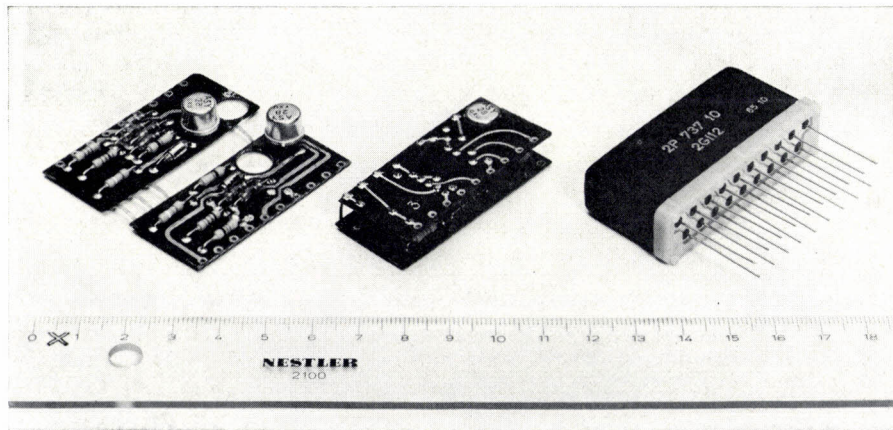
The interior of the circuit blocks. The circuit is arranged on two printed wiring boards which are folded together and inserted into a metal casing filled with a rubbery compound.
